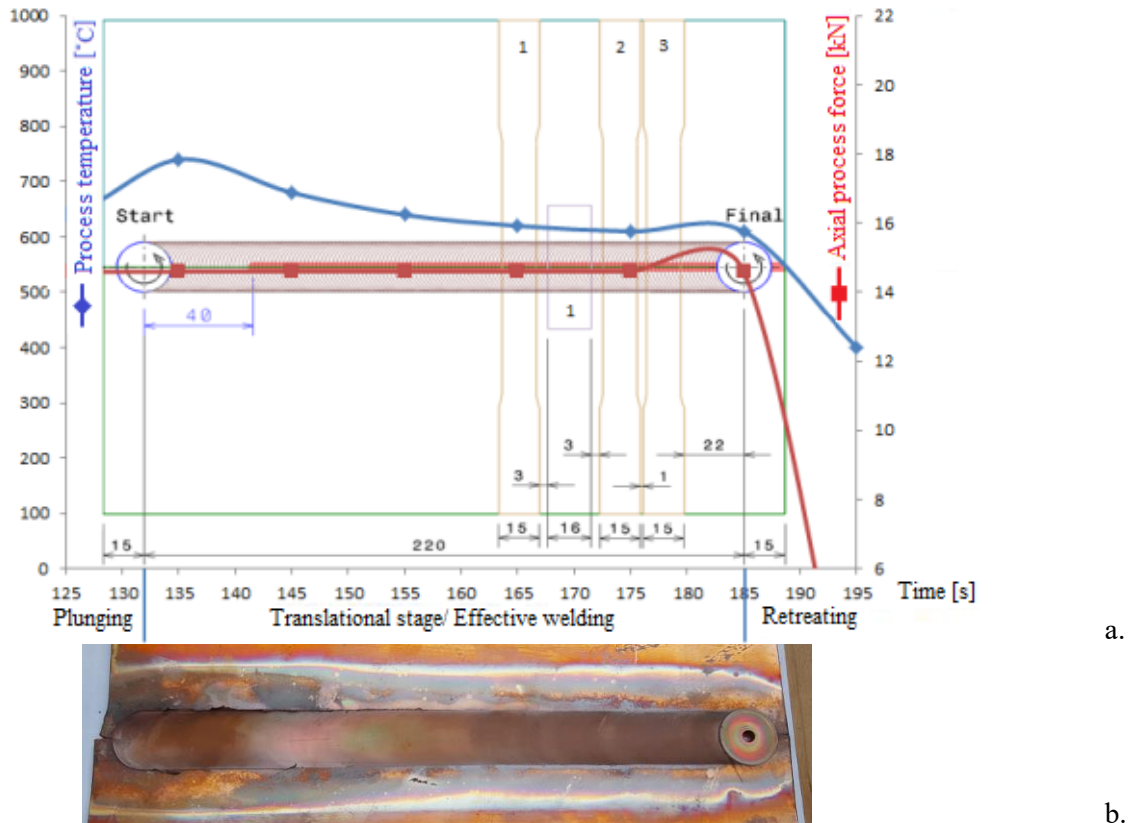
Process temperature, axial process force (a) and aspect of the welded joint (b) at FSW-TIG welding - exp. 2.10 (n = 1000 rpm, w = 250 mm/min, I = 80 A)
